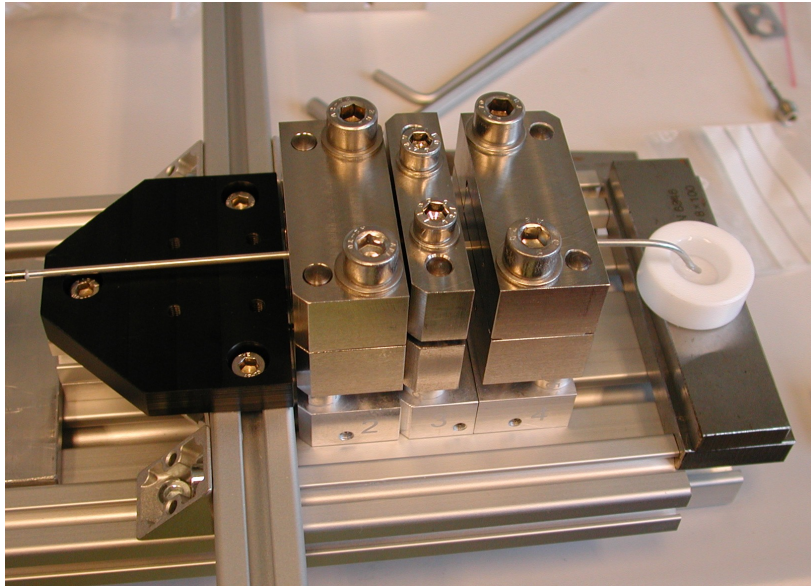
Test of the eROSITA heat pipe crimping procedure. The capillary was put under a pressure of 60 bar helium and crimped until leakage vanished. This gave us the optimum final thickness of the capillary for the welding process.
